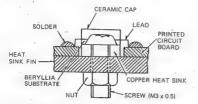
Installation Procedure for Flange-Mounted Ceramic-Encapsulated Transistor with Printed Pattern on the Upper Surface
